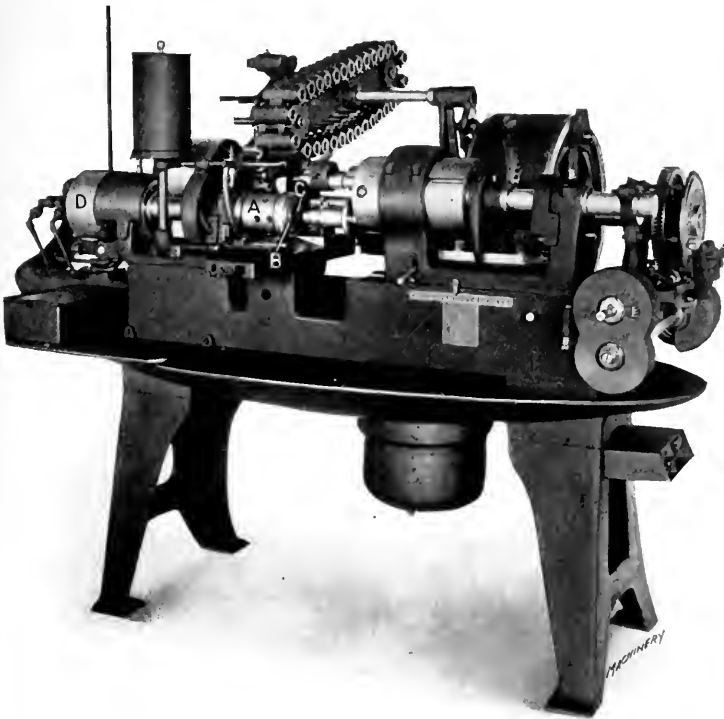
Front View of Cleveland Automatic for machining Brass Nuts
